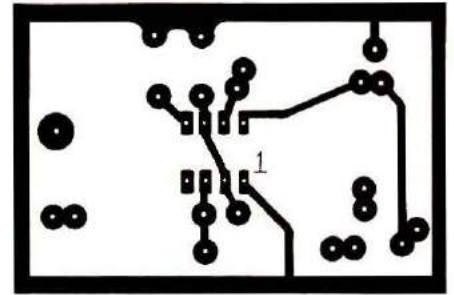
Full-size pattern for the printed-circuit board, foil side. A parts-placement guide is given in Fig. 5.
